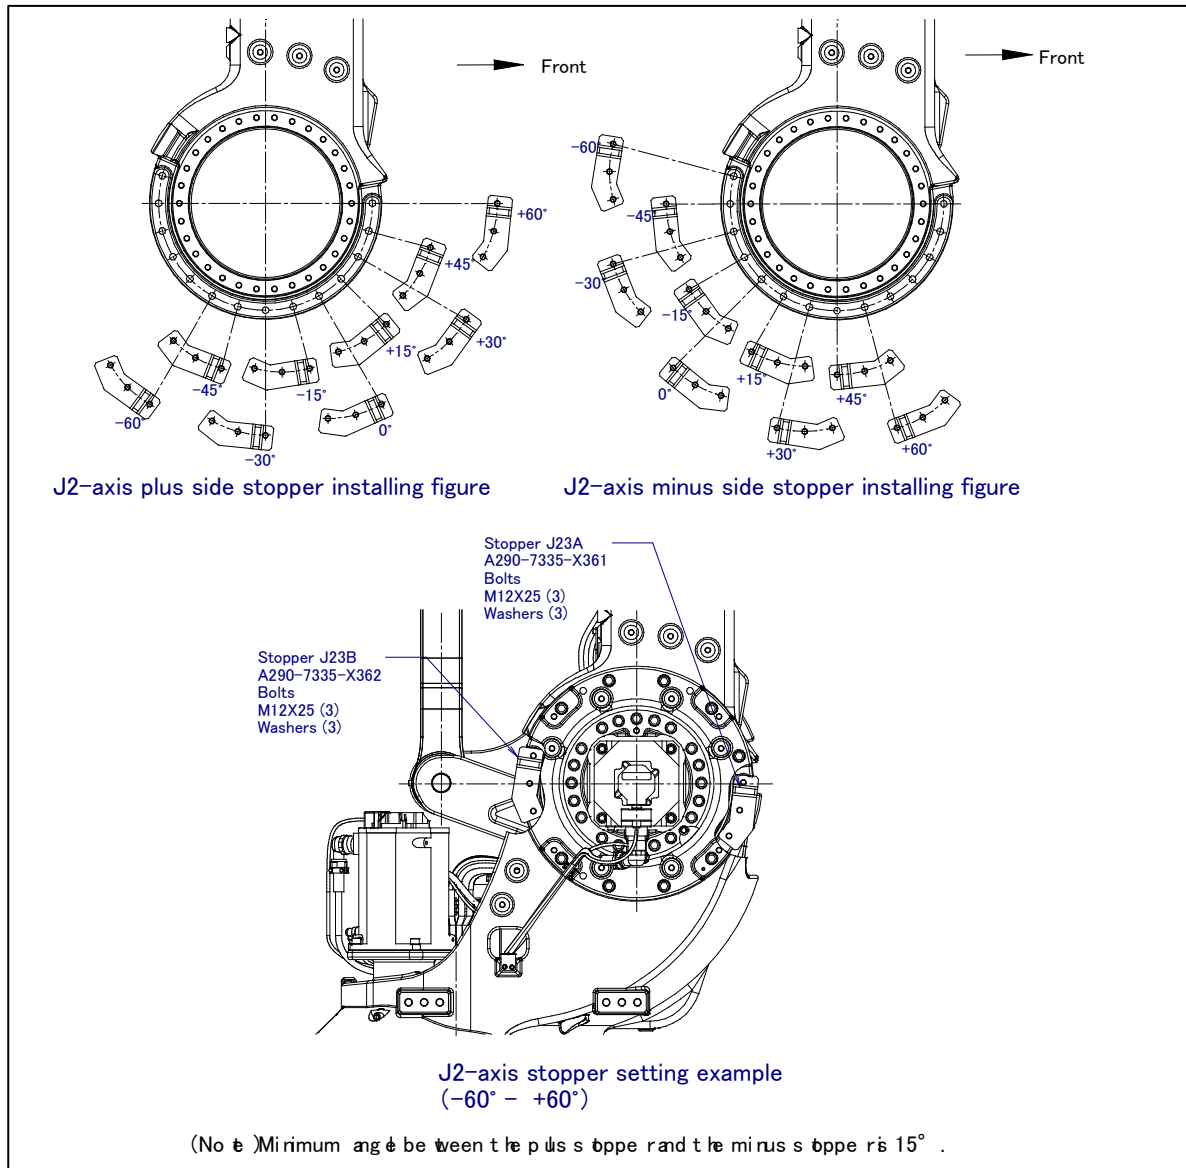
(e) Adjustable mechanical stopper locations of J2-axis
